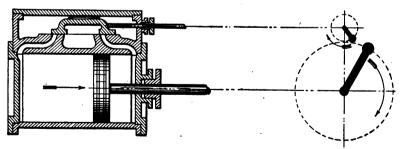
Valve Position with Exhaust Port Closed on Crank End
